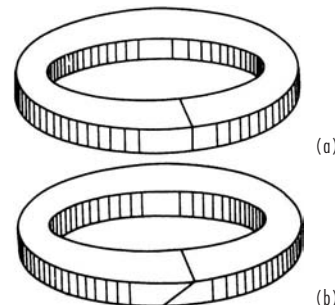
Butt (a) and skive (b) joints for compression packing rings.
